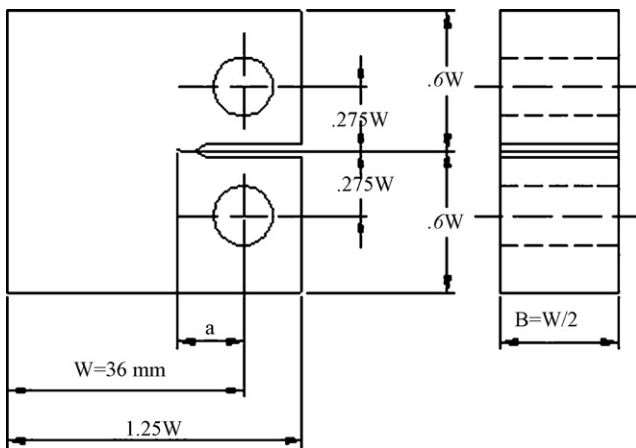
Dimensions of ASTM D5045 compact tension specimen.
